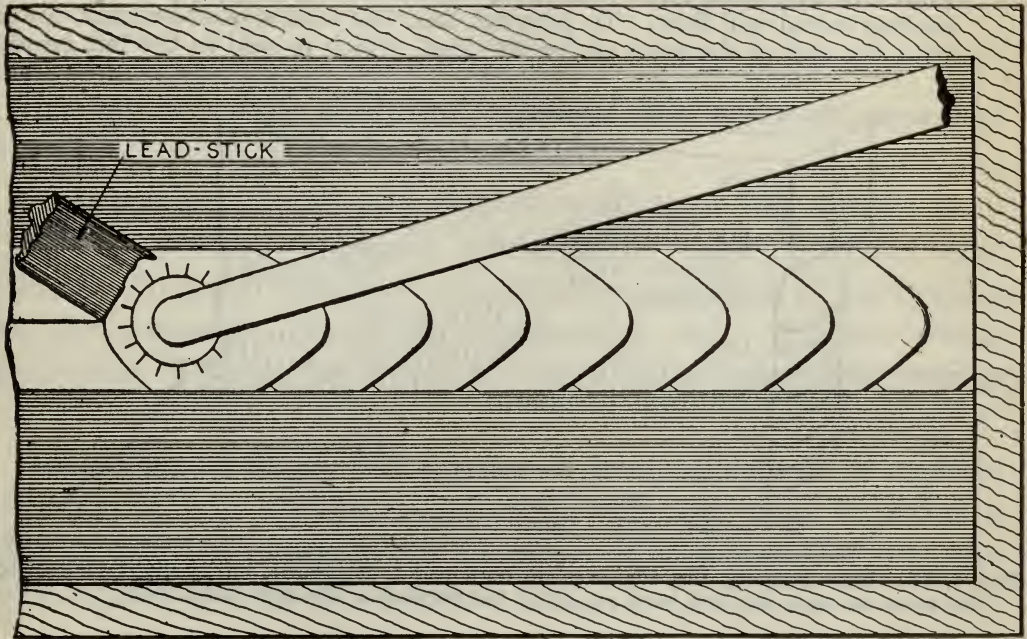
,476.—Process of burning a butt seam in two sheets of lead.
